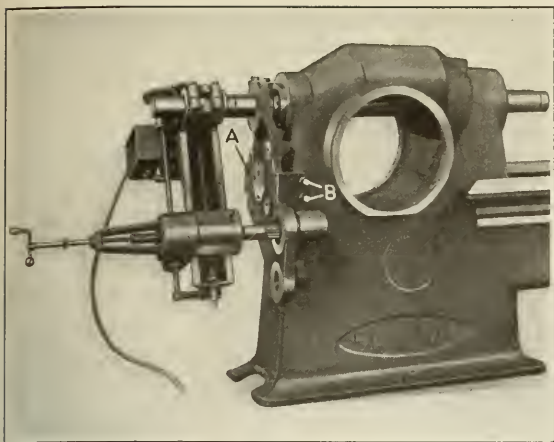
Radial Drilling Machine set up for drilling Holes for Feed-screw, Lead-rod, and Screws for securing Feed-box to Bed
